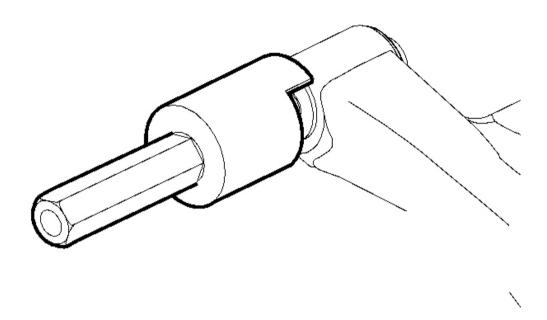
Front Control Arm Bushing Courtesy of GENERAL MOTORS CORP.
